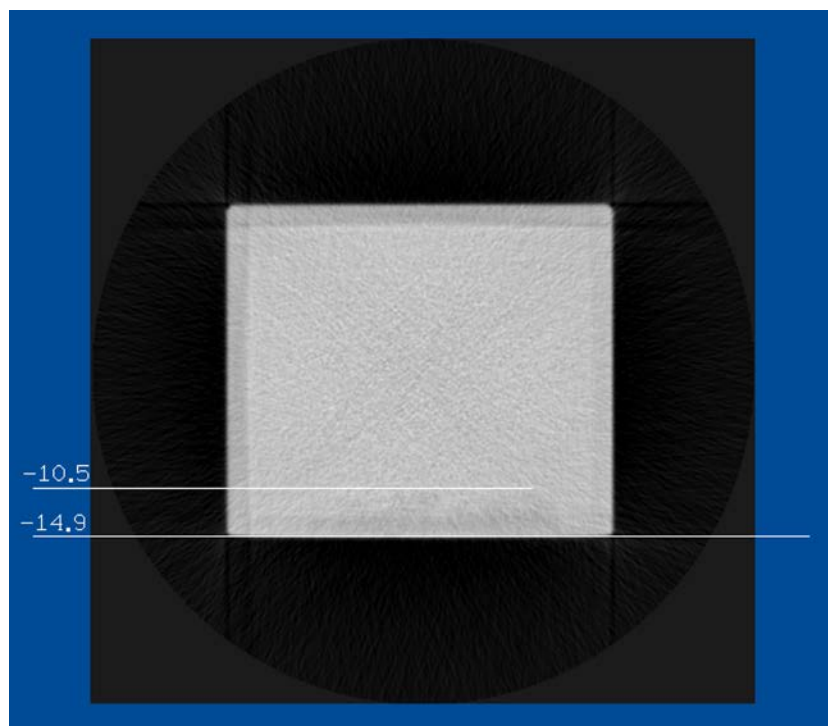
CT-slice #29 ($z=110.16$ mm) of test block P38 (N 220 AD U TS 3), crack depth: 4.4 mm (± 2 pixel = 0.24 mm), 14.5% of weld thickness
